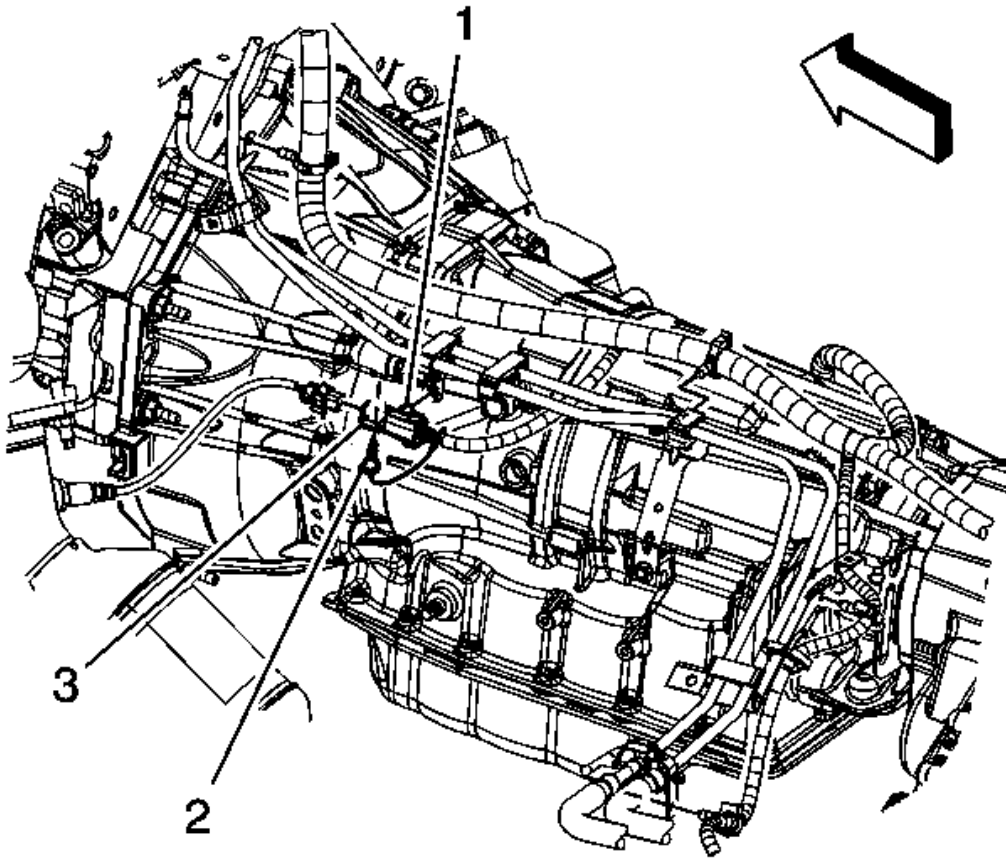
View Of Engine Wiring Harness Electrical Connector Clip & Electrical Connector
